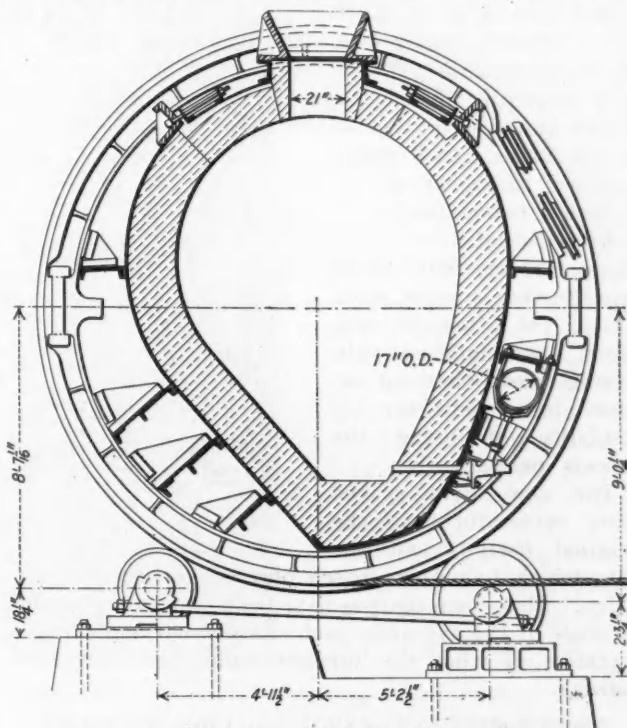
REVISED DESIGN SECTION THROUGH CHARGE HOLES
